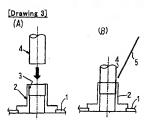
As for (A), it curses after the copper pipe push in of the conventional copper pipe plug nozzle, and the expanded sectional view in front of the copper pipe push in of the conventional copper pipe plug nozzle and (B) are an expanded sectional view at the time.
